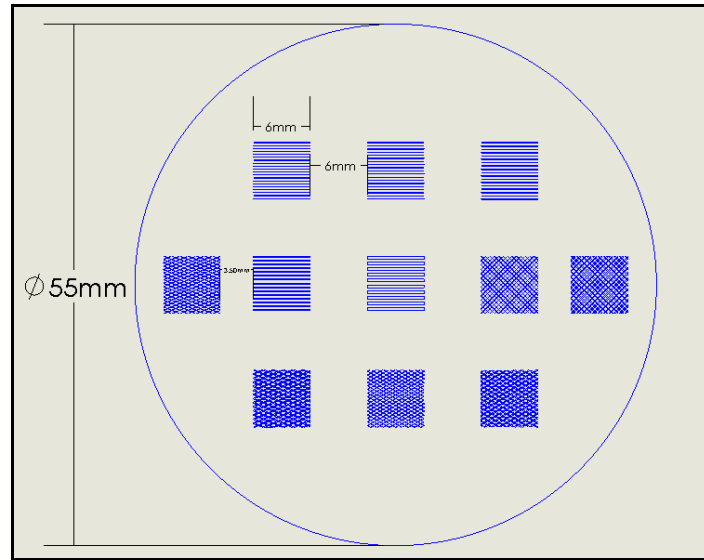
SolidWorks drawing of photomask with eleven stamp designs
